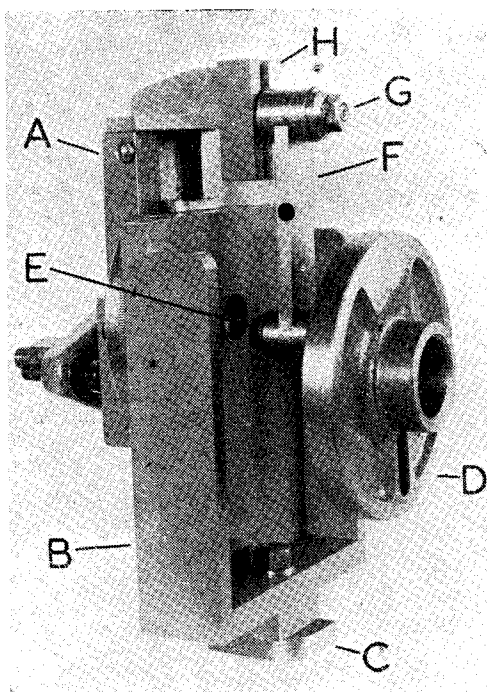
Showing the driving mechanism of the attachment. "A"—the topslide; "B"—the bed bracket; "C"—the clamp plate; "D"—the crank disc; "E"—the crankpin; "F"—the connecting-rod; "G"—the small-end bolt; "H"—the slide bracket
